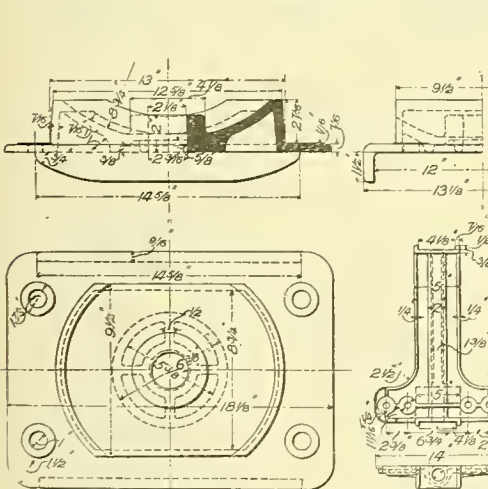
a-b. CENTER-PIECE OF UNIVERSAL BRAKE-BEAM STRUT.
